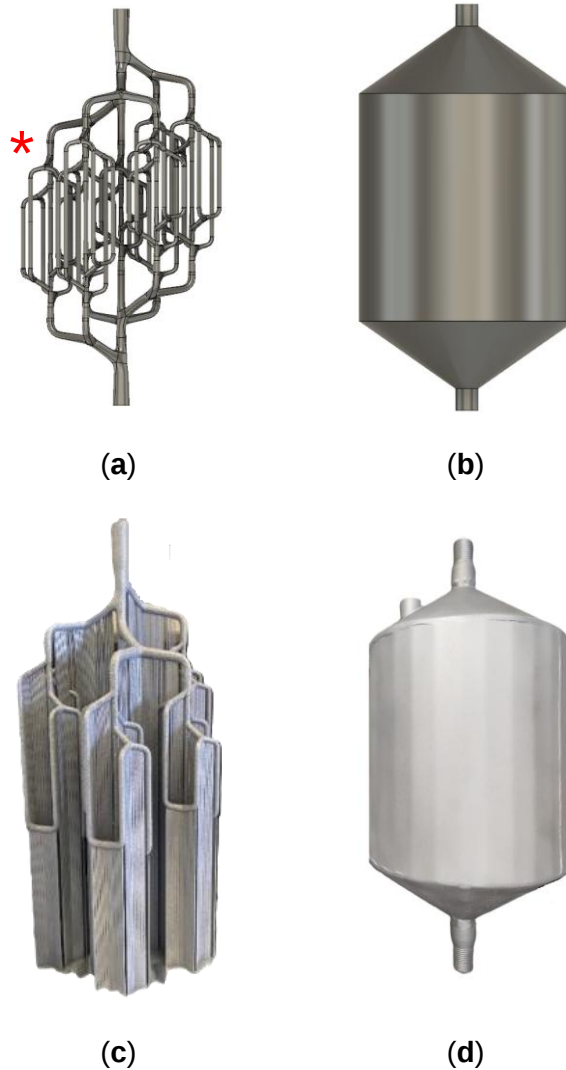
Schematic representation and pictures of the TES tank: (a) CAD design of the bio-inspired HTF tubes of the TES tank, (b) CAD design of the shell of the TES tank, (c) picture of the bio-inspired HTF tubes during the additive manufacturing process, and (d) picture of the final bio-inspired TES tank (“*” represents the position of the thermocouple) [1].
